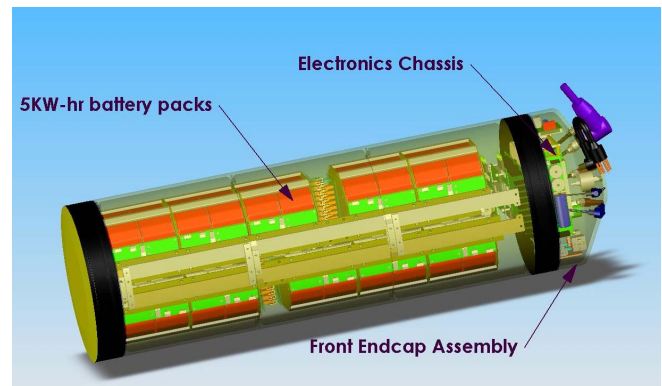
Battery Housing with Electronics Chassis and Endcap Assembly
